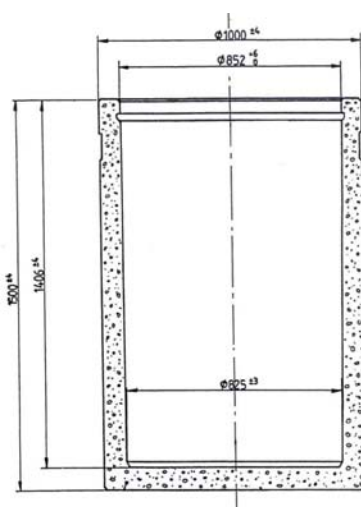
CBF-C2 type fibre-reinforced concrete cylinder
